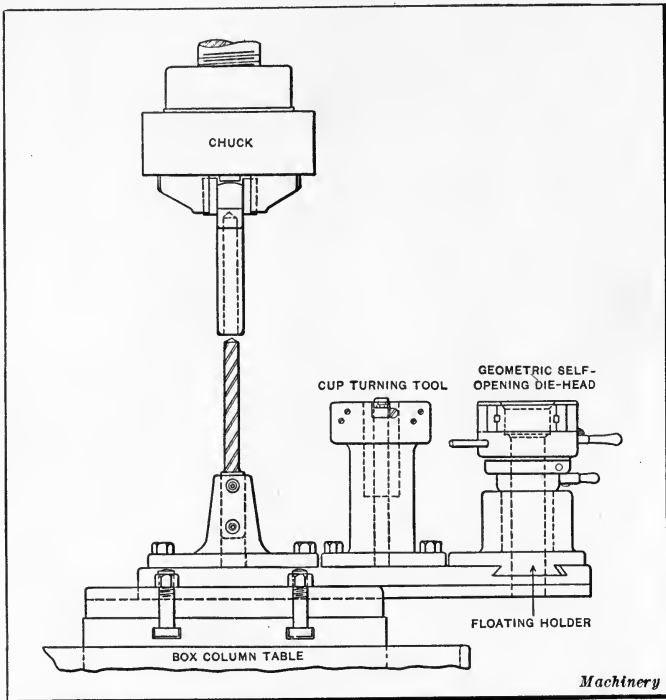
Fixture for Drilling, Turning, and Threading Work
